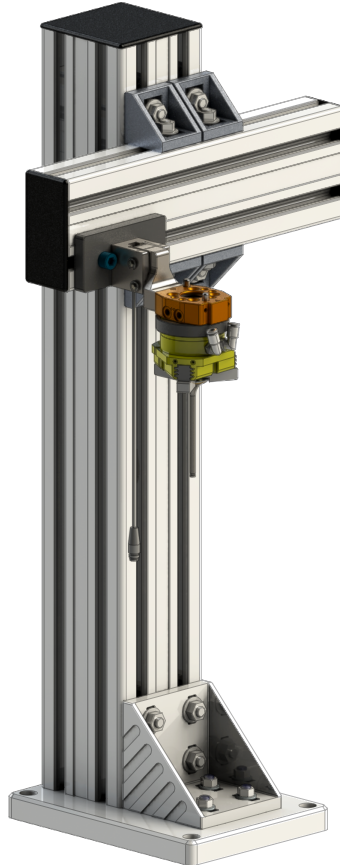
TSS Tool Stand with Slotted Mounting Module Configuration
